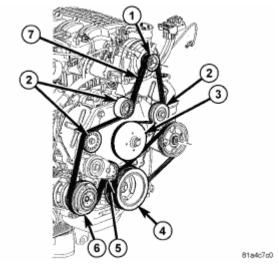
Accessory Drive Belt Routing Courtesy of CHRYSLER LLC
